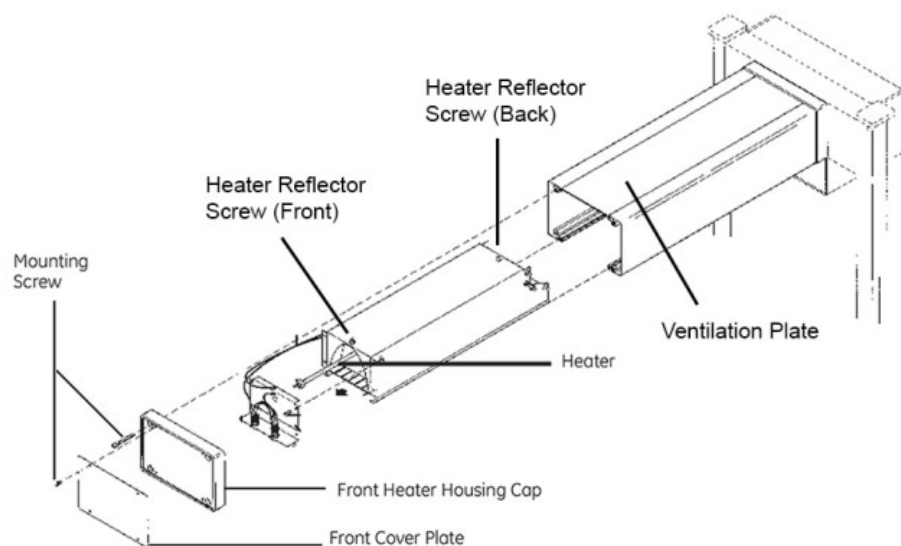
Heater Head Assembly – Units with HAK, AAN, HAJ, or HCA Serial Numbers
